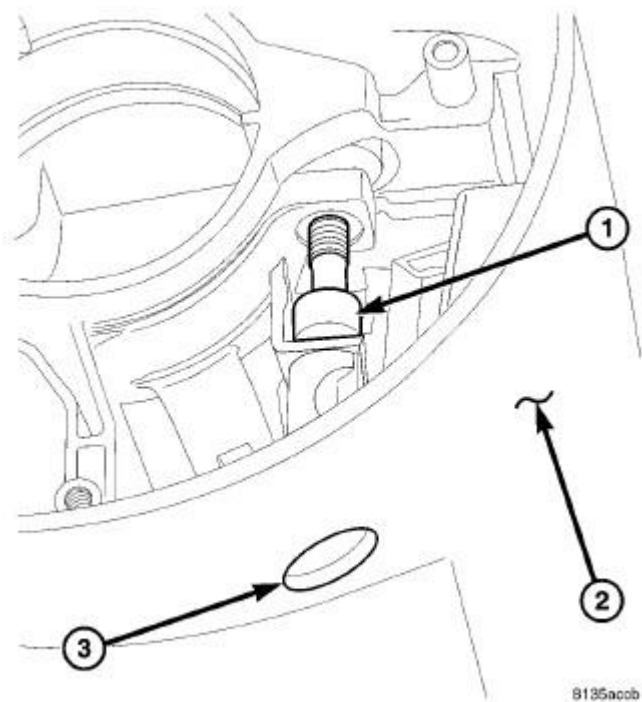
STEERING COLUMN CONTROL MODULE SCREW
